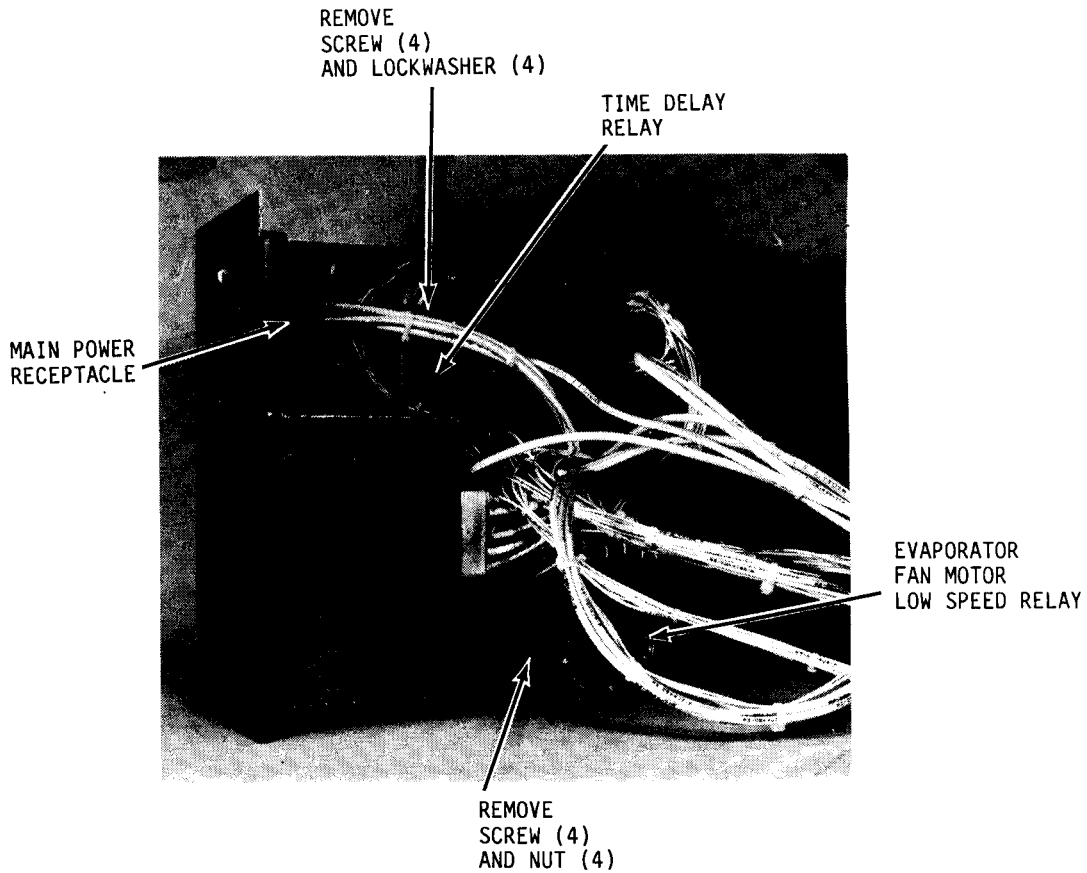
Time delay relay and evaporator fan motor low speed relay, removal and installation
